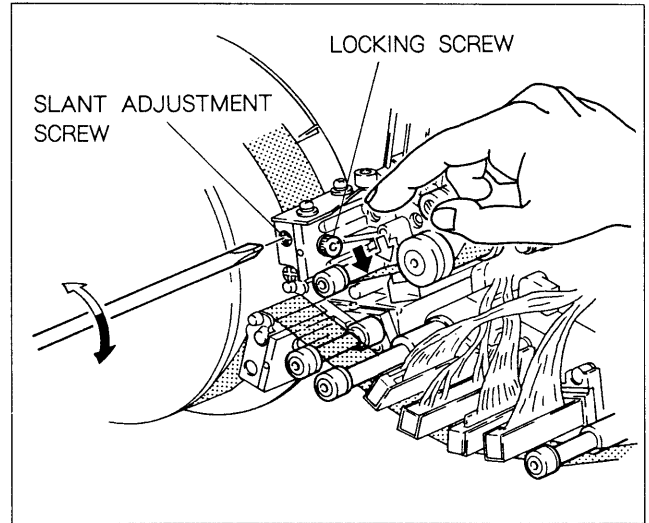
Entrance Slant Guide Slantness Adjustment
